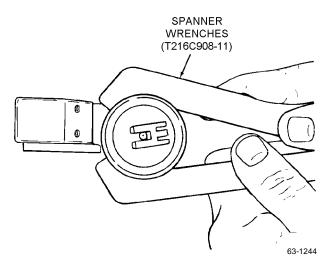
Emergency Oxygen Pressure Reducer Tool Set
